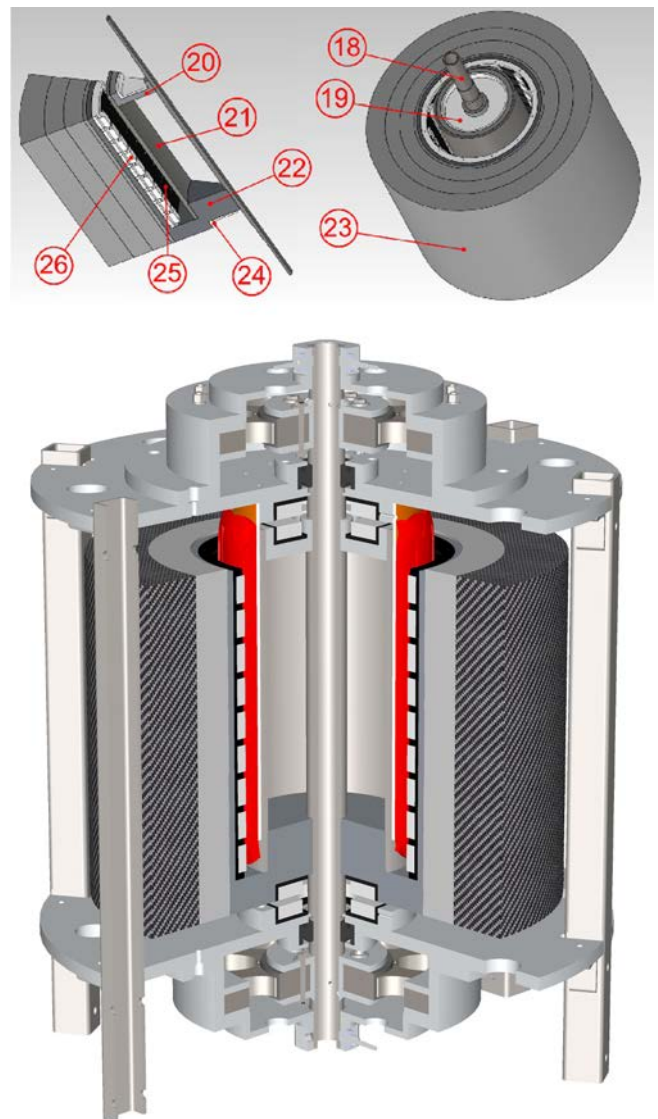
Cut view of CAD design for the constructed flywheel. Top: Rotor assembly. Bottom: Overview of complete flywheel.
